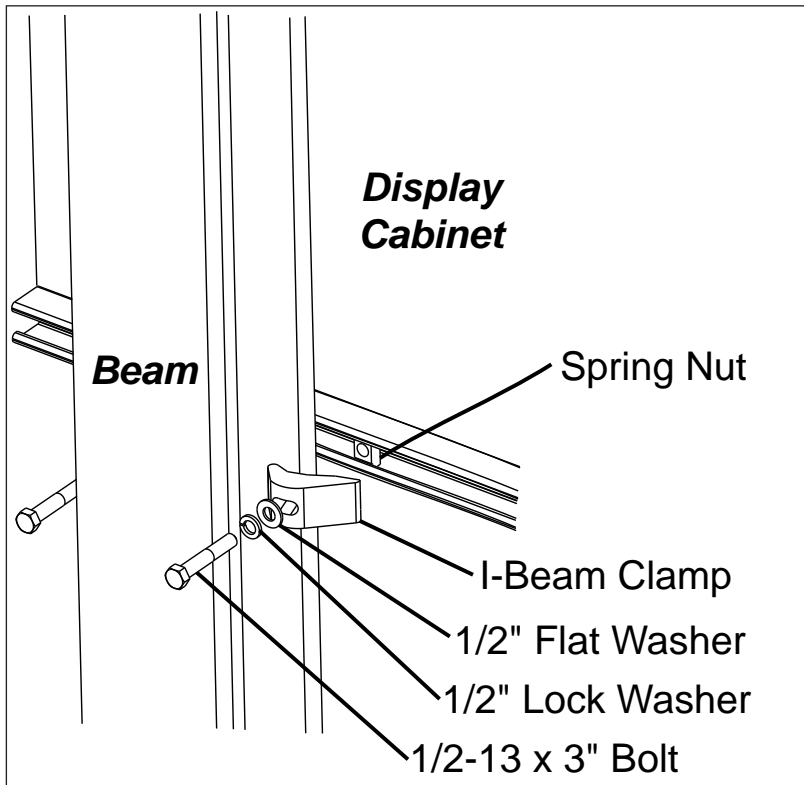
I-beam Clamp Mounting, Rear Rotated View
